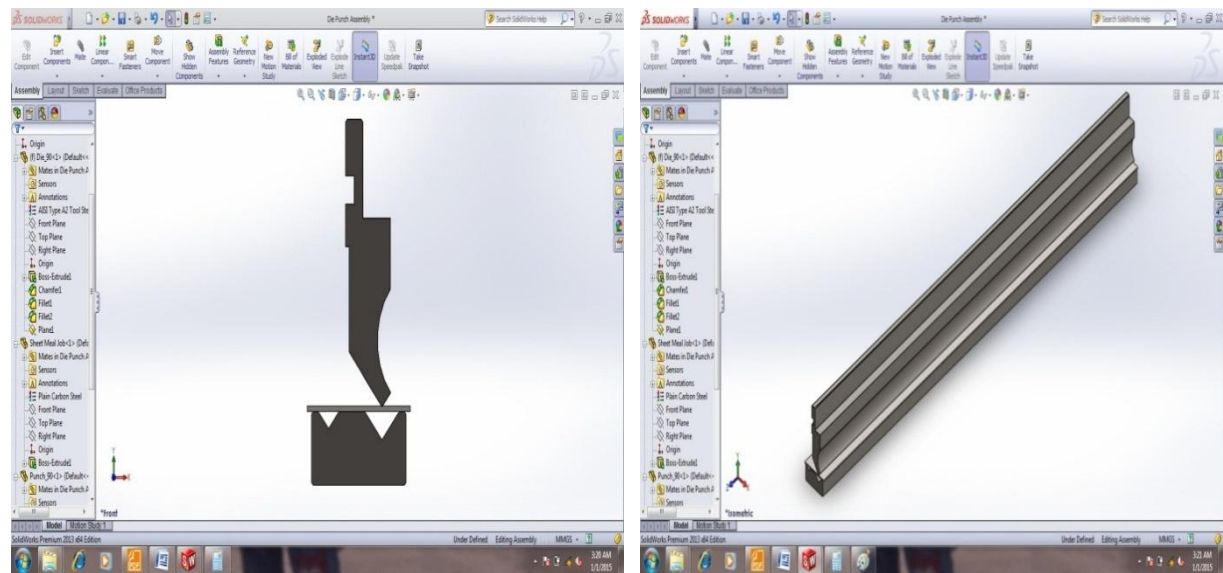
3 Assembly Modelling of Die and Punch with Sheet Metal
